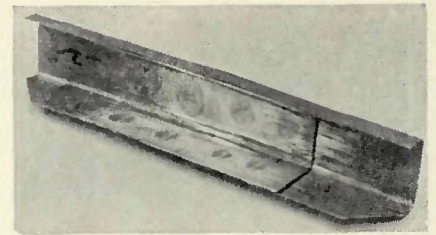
Upright made from three segments of Al-B spot welded together; upright length is 5½ in.
